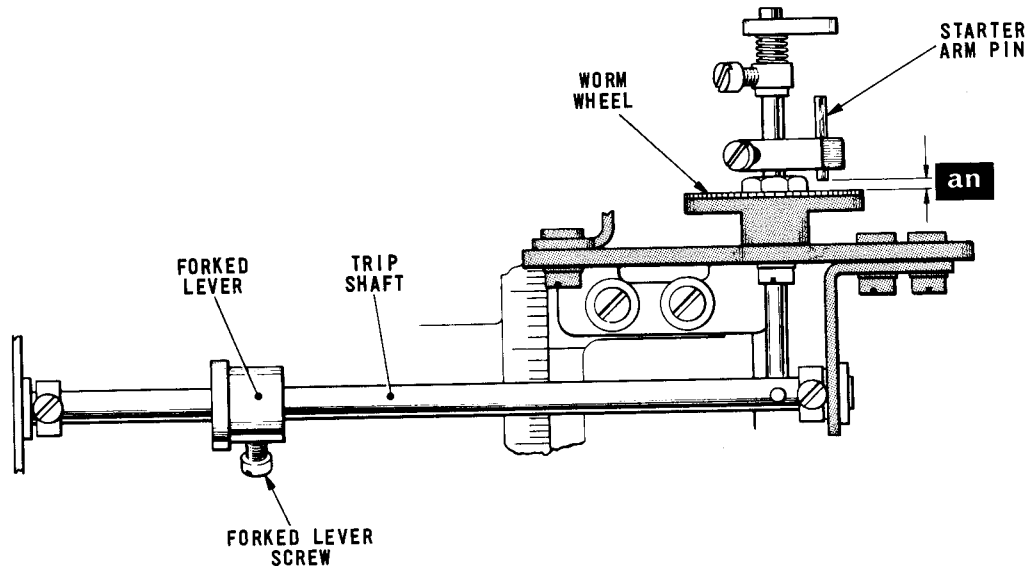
STARTER TRIP SHAFT LINKAGE
